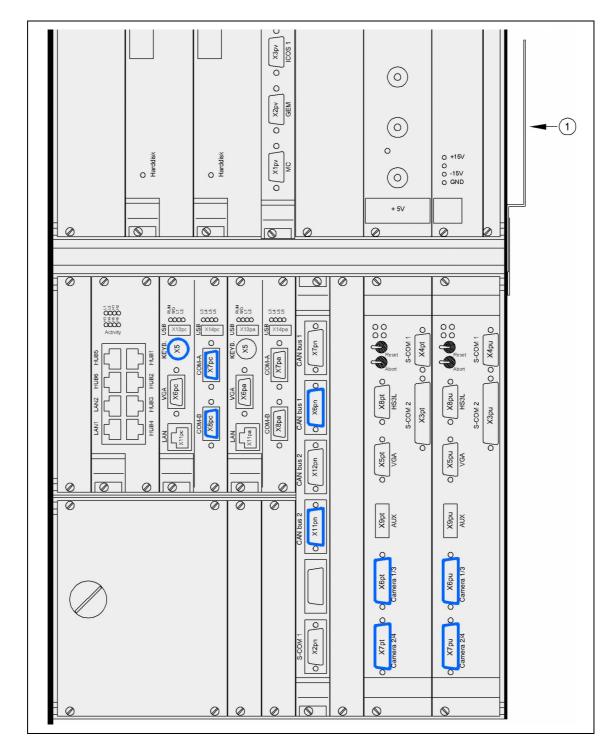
18 Fitting the "bottom" hand guard on the PCB input side
